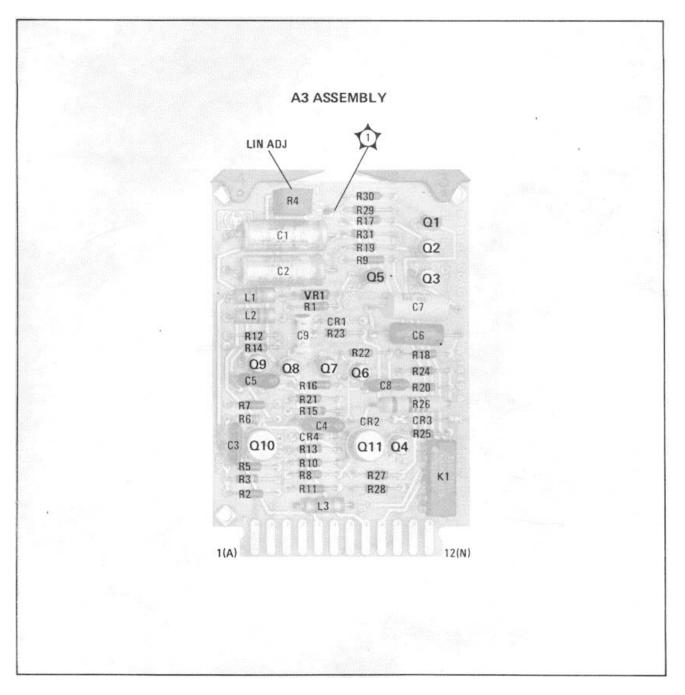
A3 ALC Amplifier Assembly Component and Test Point Locations
